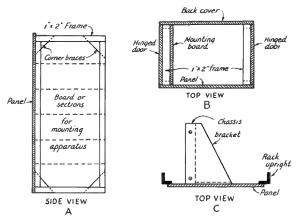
CONSTRUCTION WHICH PROVIDES MAXIMUM ACCESSIBILITY
